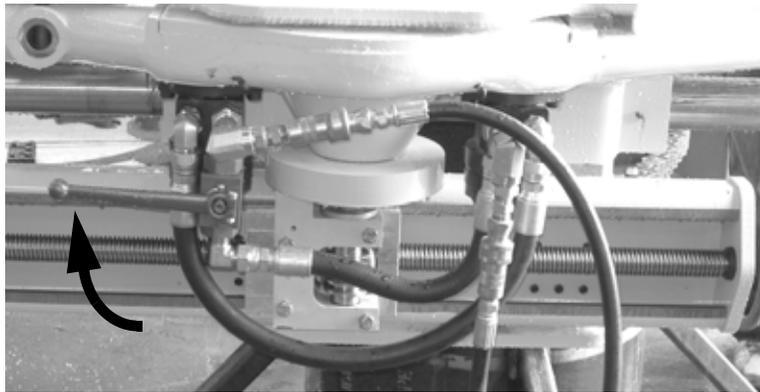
Open the flow valve (up position) to engage the saw cutting motion.
